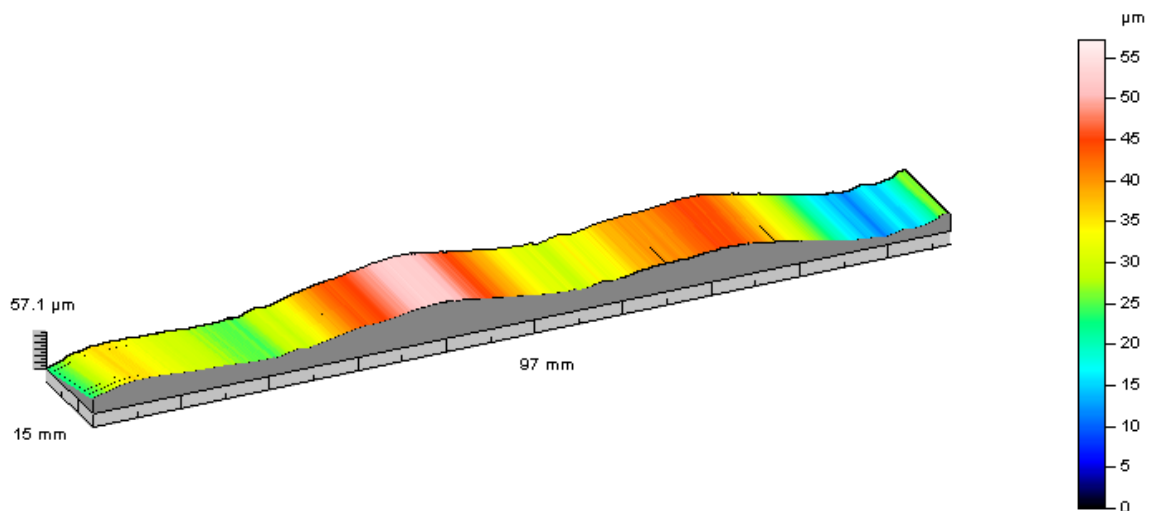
Three-dimensional representation of the measured surface profile of a thin-plate workpiece machined under the fixturing scenario, where the passive clamp ( $F_c = 20$  N) moves in a discrete manner, occupying the five points that were suggested by the fully-active fixture design methodology (see Table 7.8).
